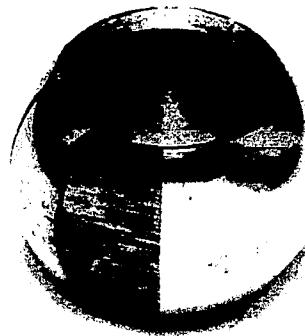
Close-up View of Fractured Drilled-Ball – Drilled-Ball Bearing S/N 2600A-1
